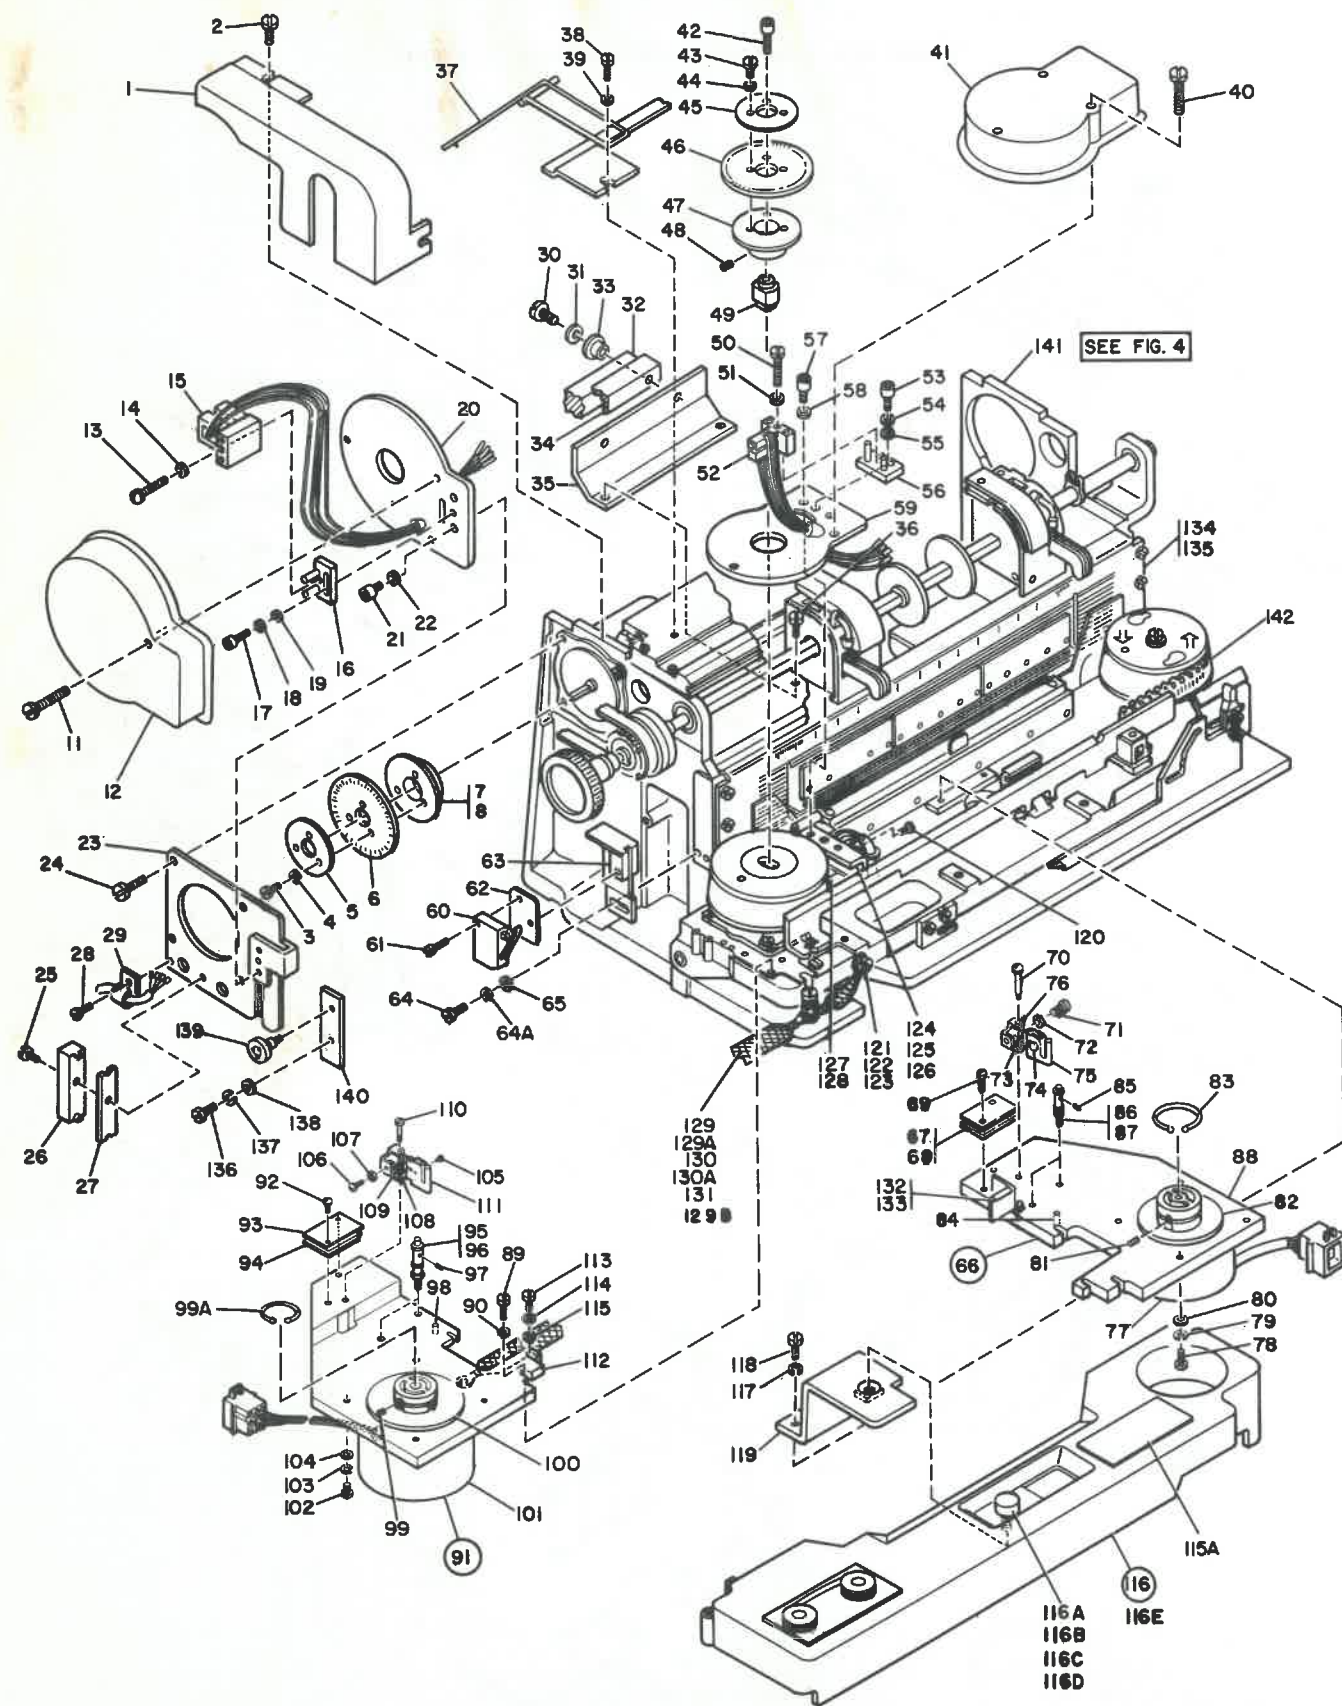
MECHANISM FINAL ASSEMBLY. SEE LIST 3.
